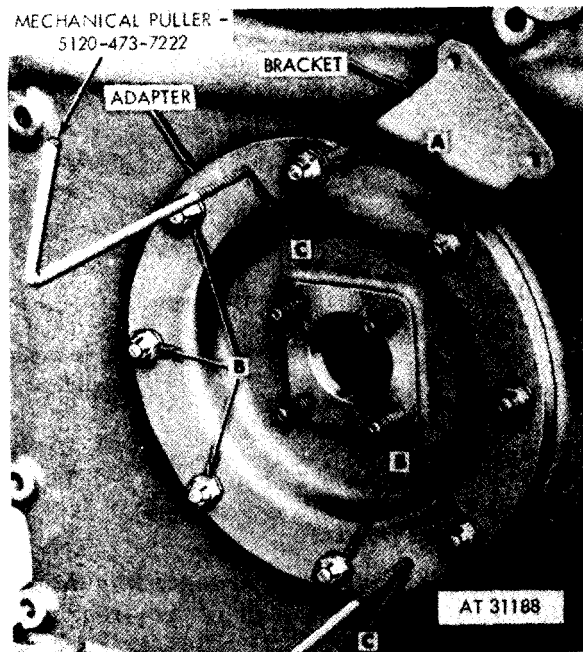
Disassembling or assembling oil pressure regulator valve.
